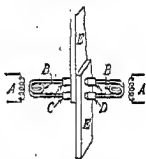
Wiring Diagram of Duplex Spot Welder.
